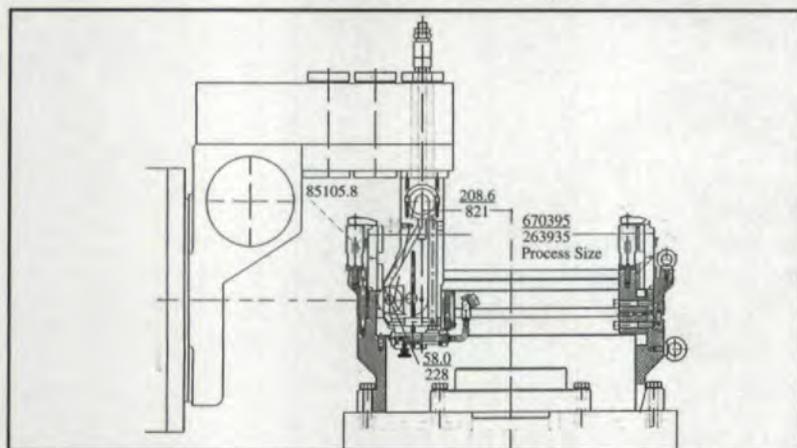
Layout of internal grinding setup for 117-tooth, internal double helical gear. Note the location of the grinding arm position on the grinding head. There are three possible positions to mount the arm, depending on the workpiece geometry.
